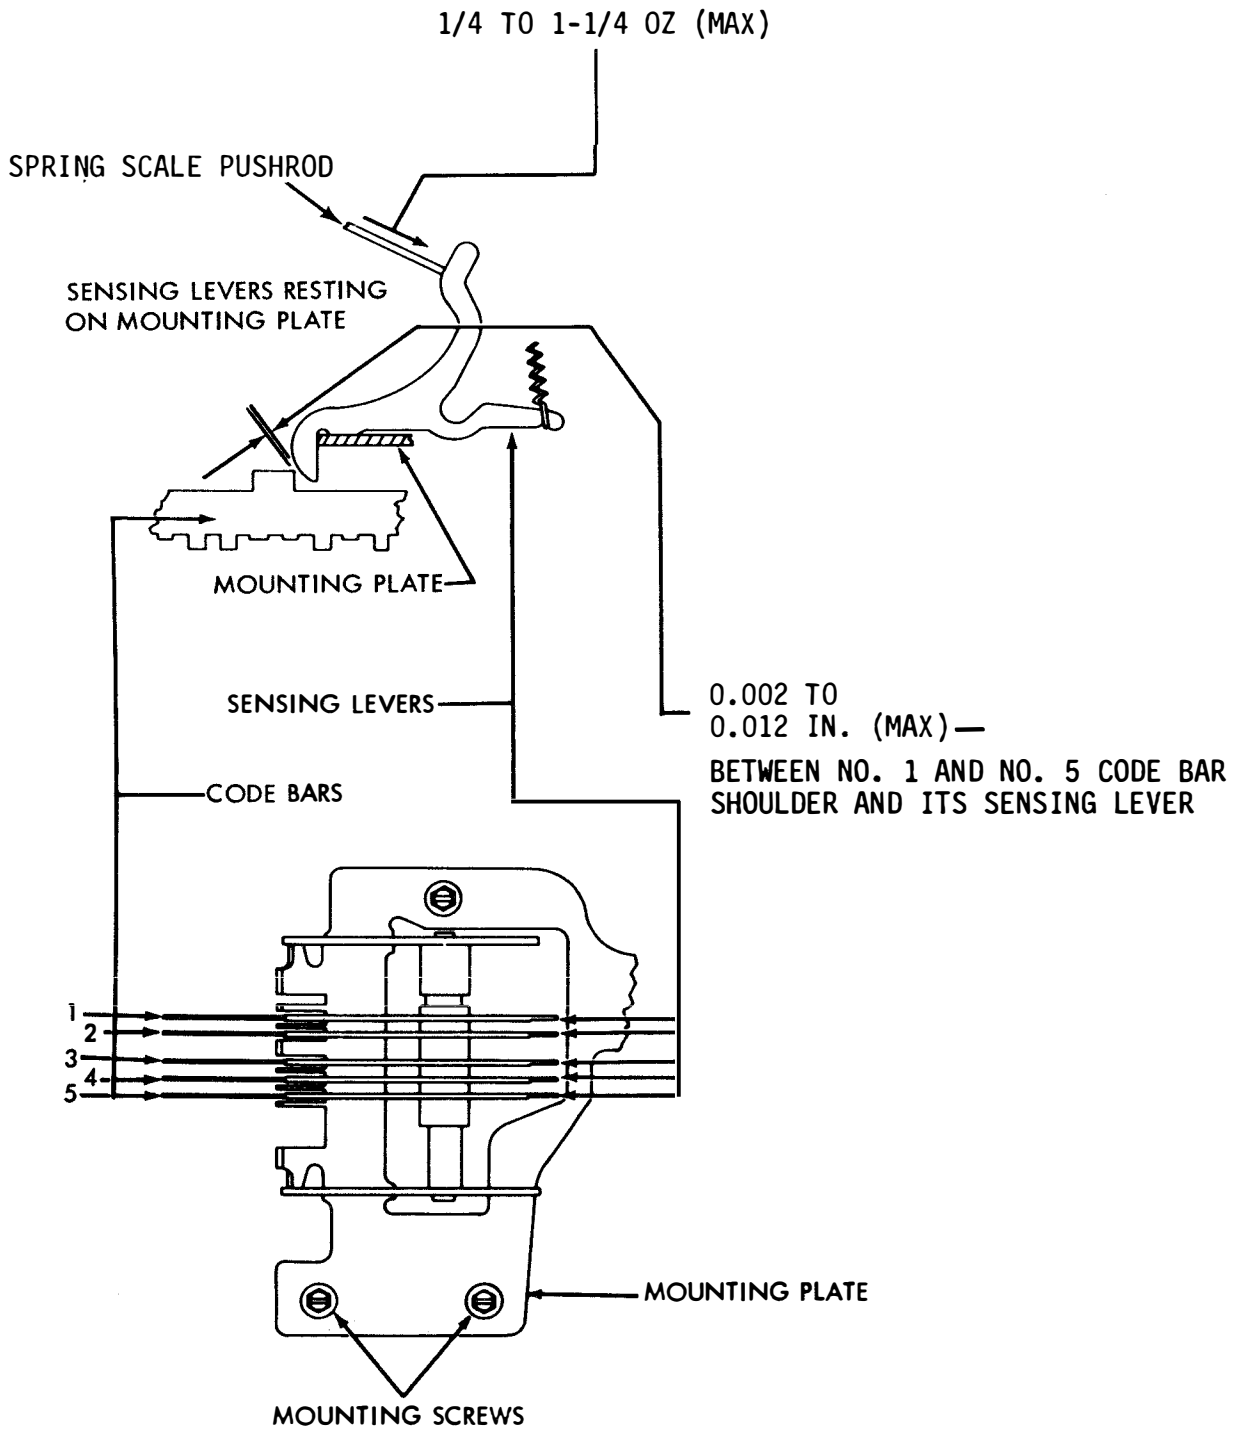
Sensing Lever Springs and Character Generator Mounting Plate
